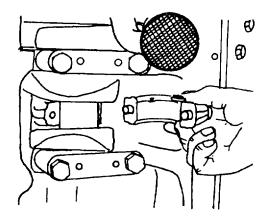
Positioning Big End Bearing Bearing on Crankpin
